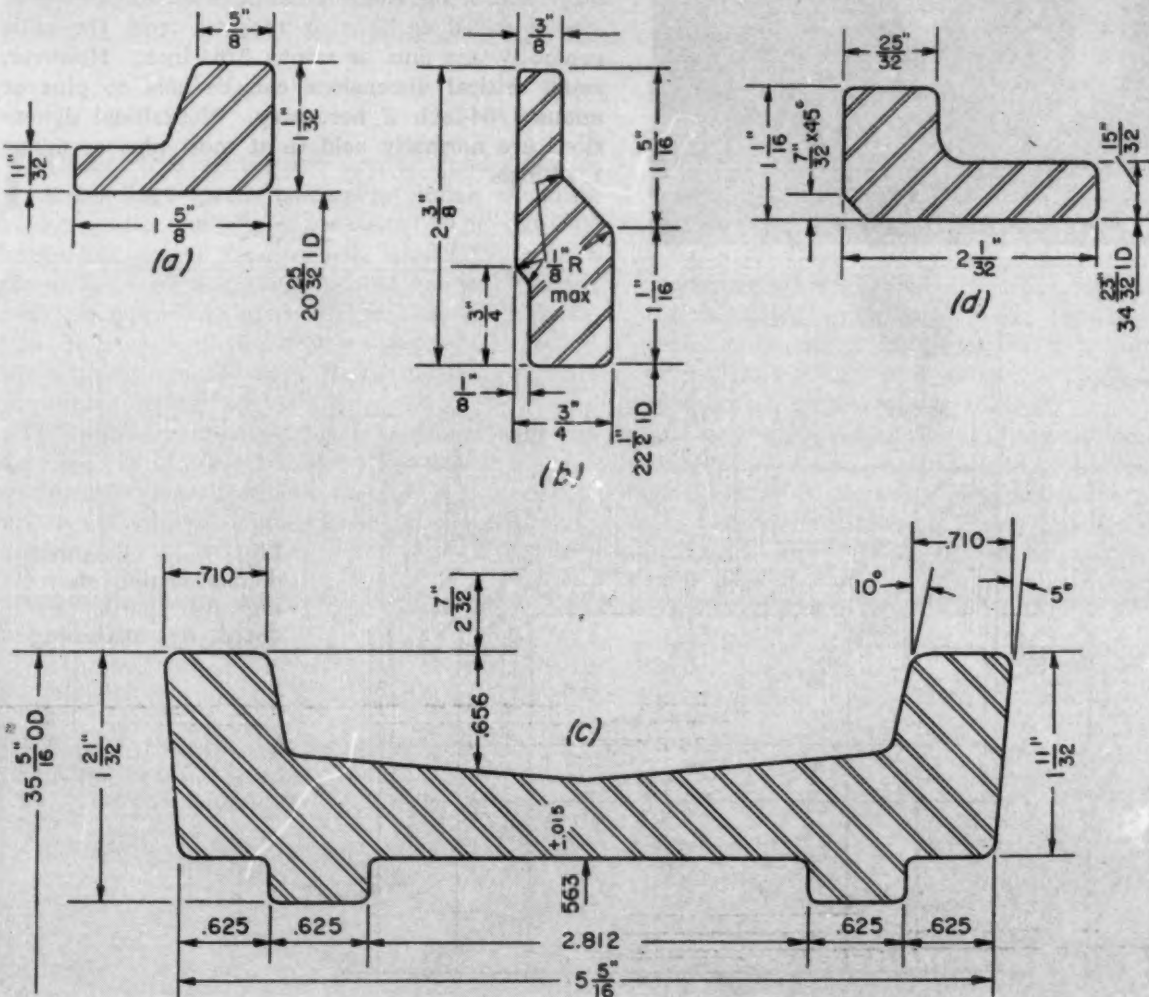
Above—Group of typical special rolled sections utilized for rolled and flash-welded rings
